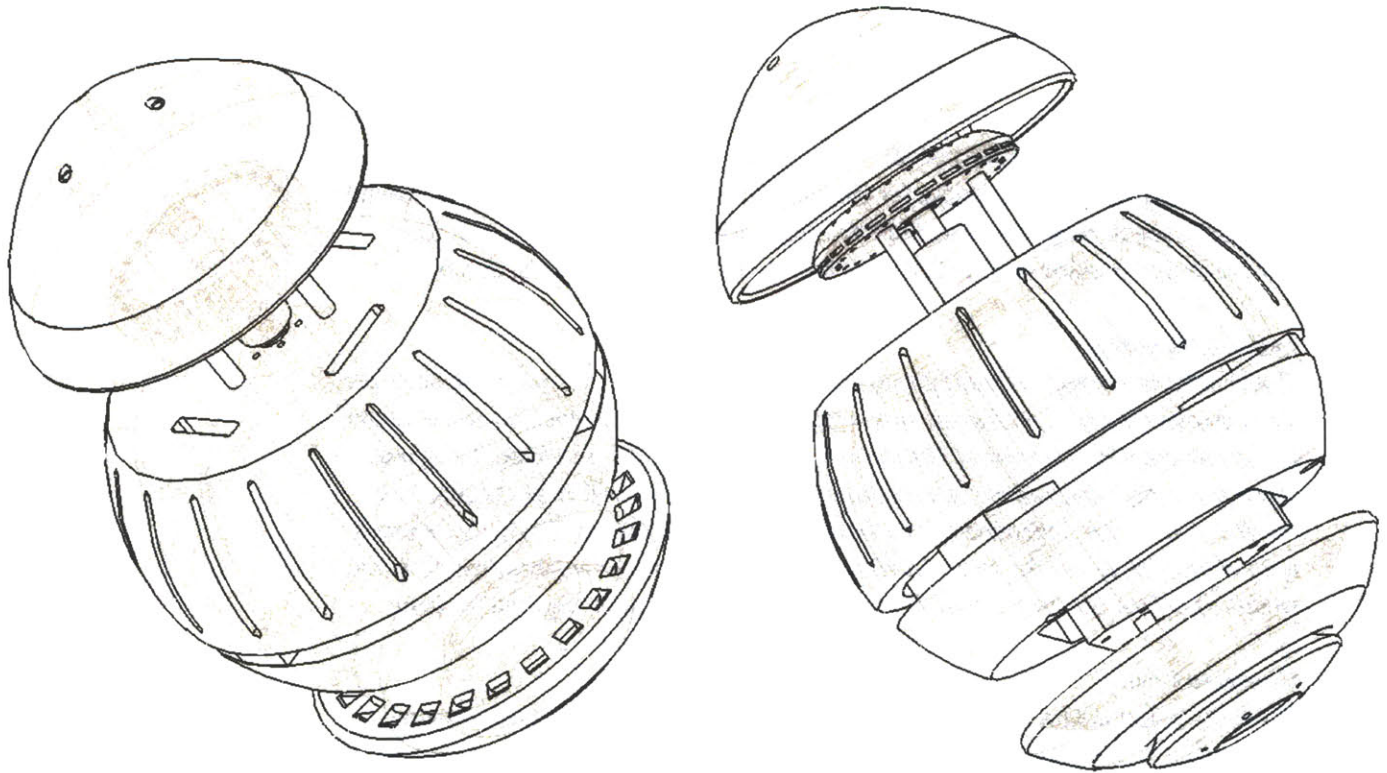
Solidworks model of Omo's mechanical assembly.
